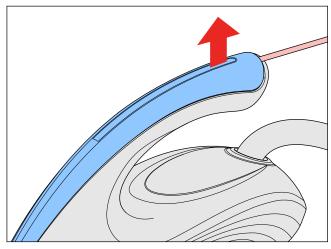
Using "-" screw driver to lift up the Inlay and release the catch at the end of the handle.
